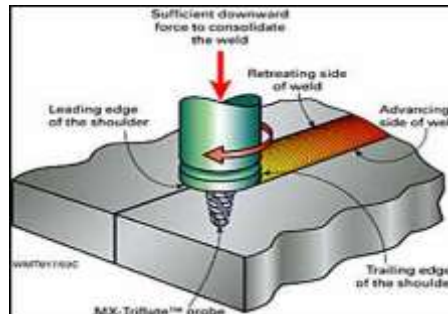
Principle Diagram of friction Stir Welding
